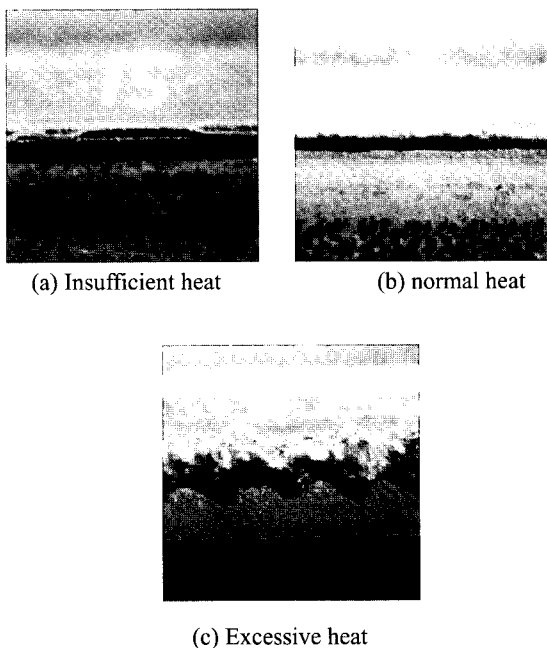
Typical bead shape images of the HERW pipe according to welding conditions.
